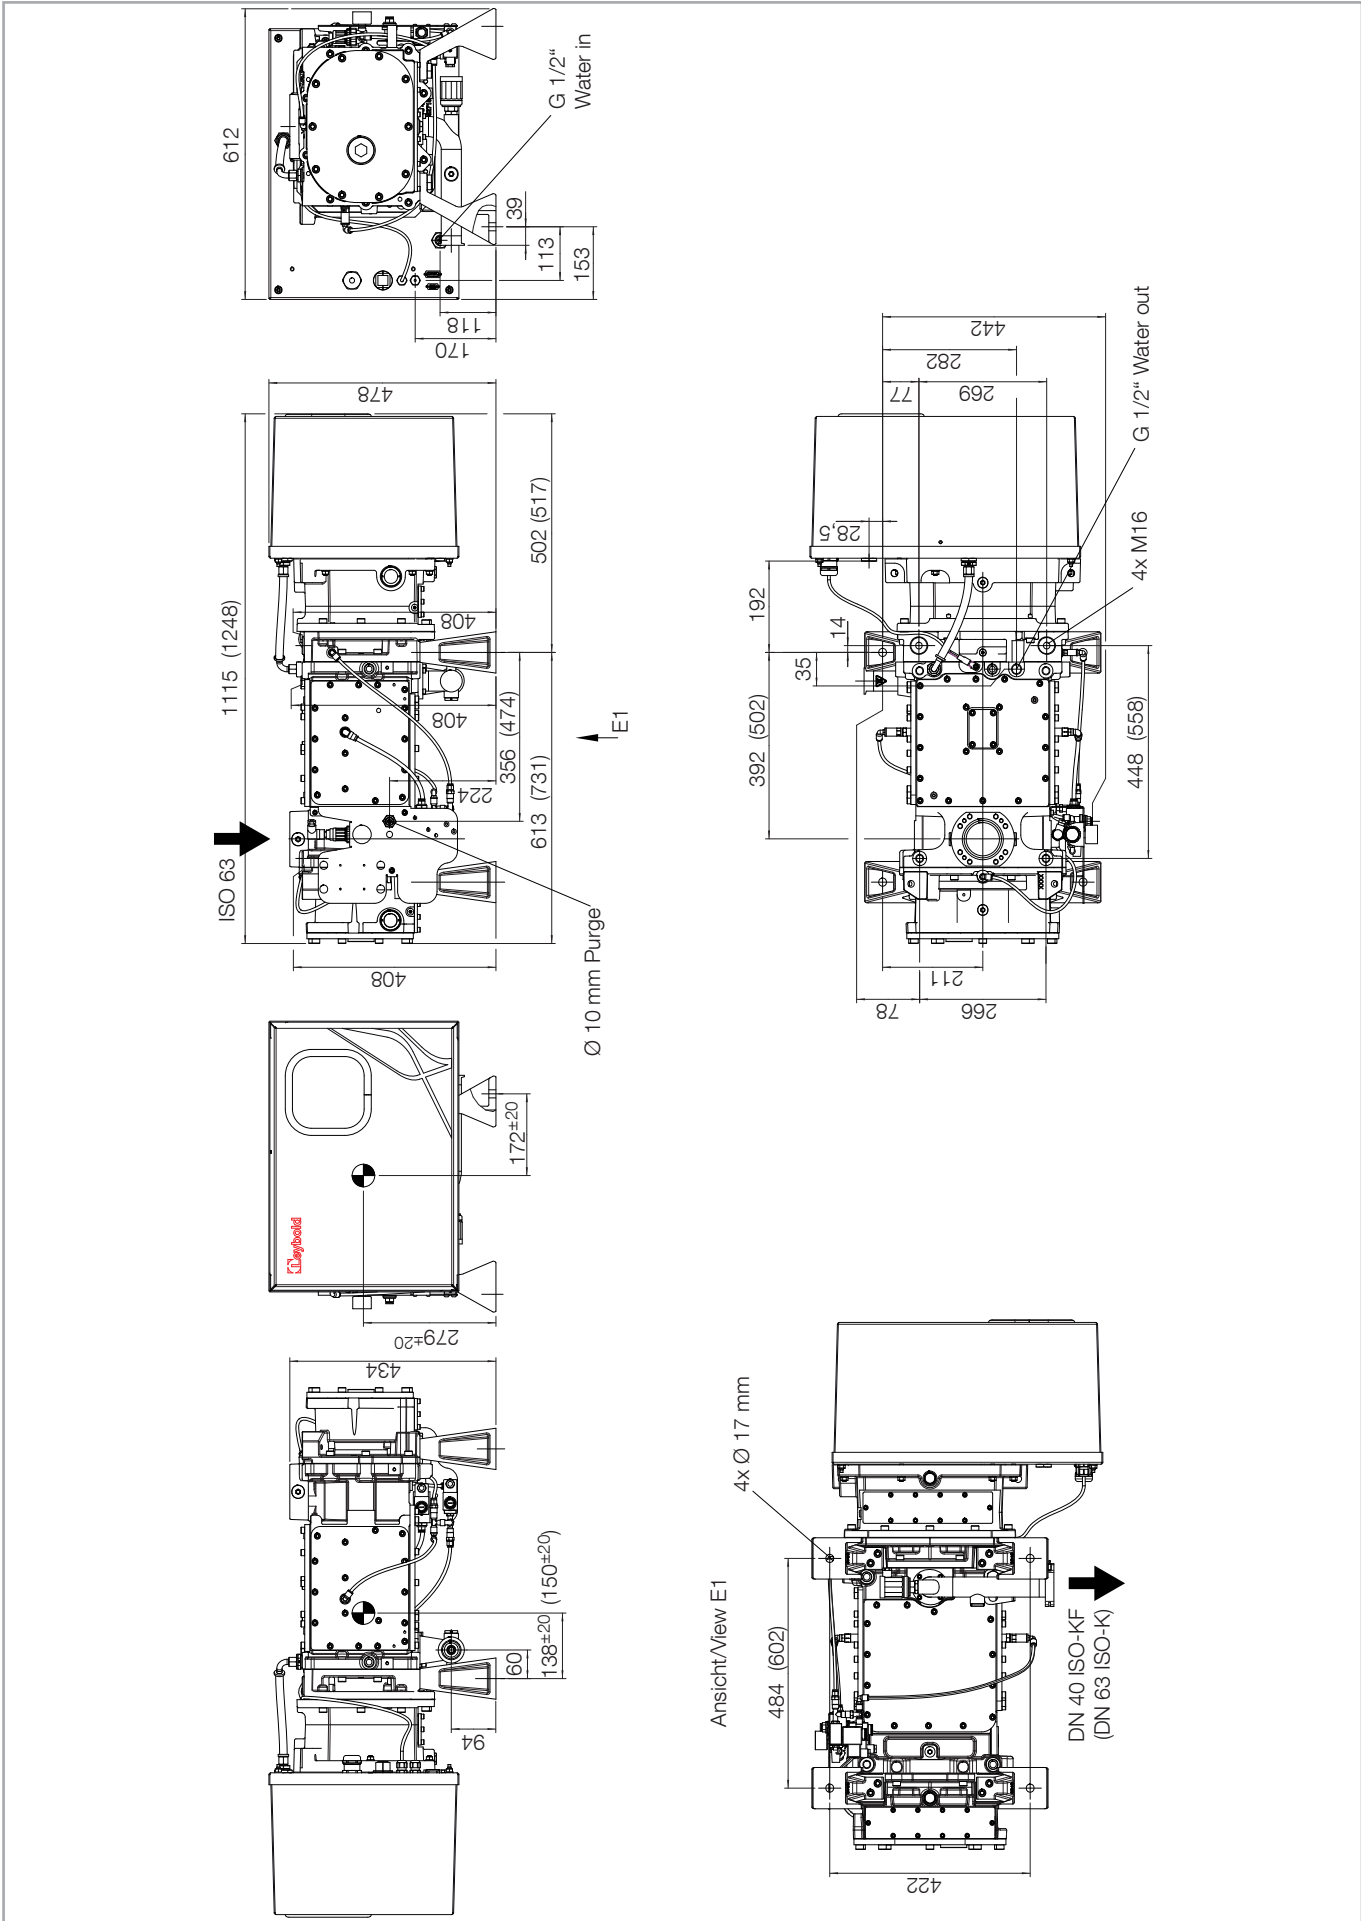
Dimensional drawing DV 200, DV 300 & (DV 500), dimensions in mm
